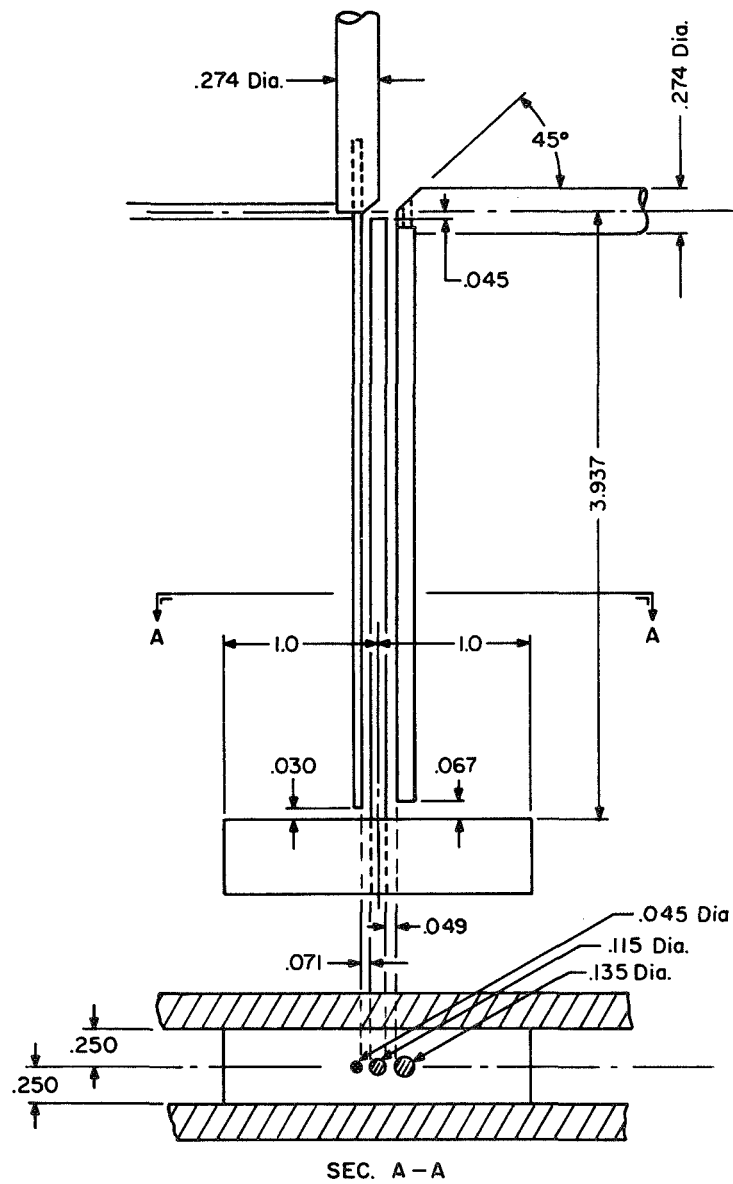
(b) DRAWING OF DIPLEXER FOR BAND I SHOWING DIMENSIONS OF CIRCUIT ELEMENTS
